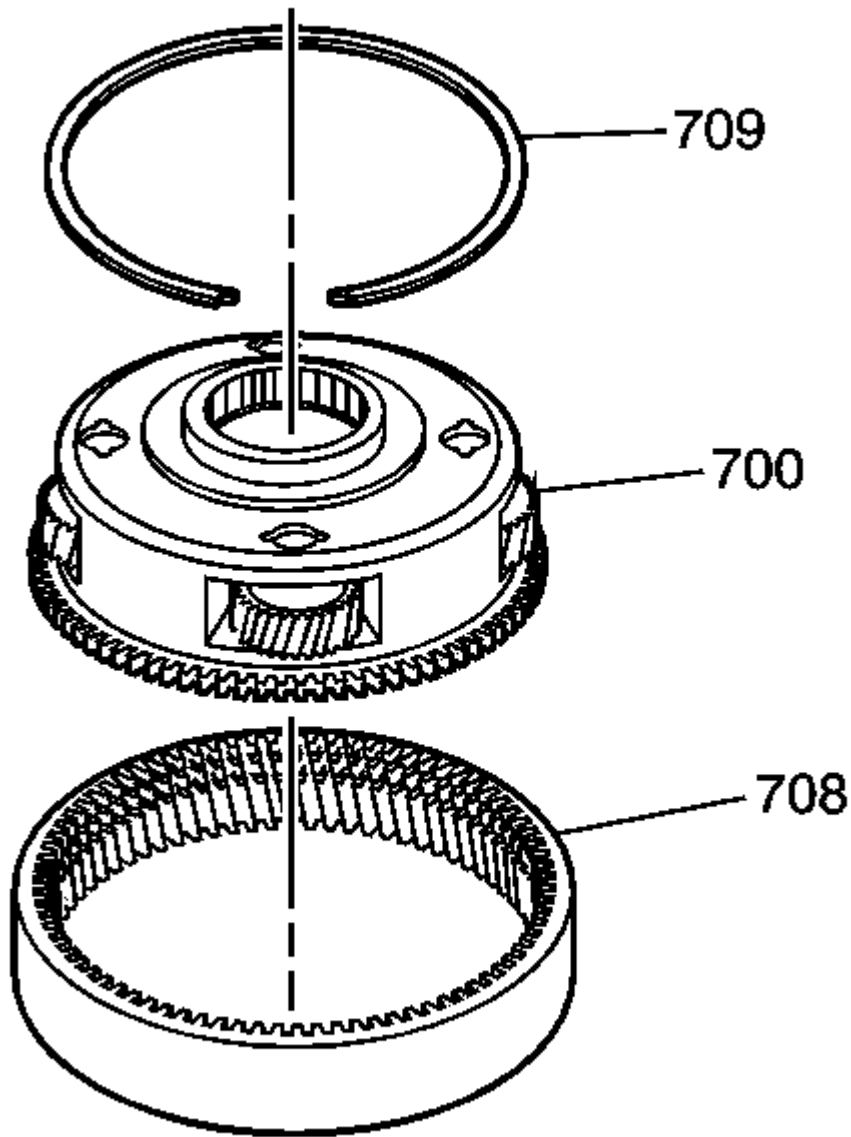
View Of Input Carrier Assembly, Reaction Internal Gear & Snap Ring
